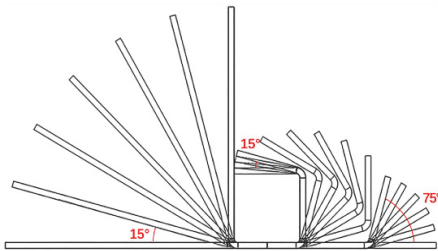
The process of progressive forming by roll forming of sheet material [3]
